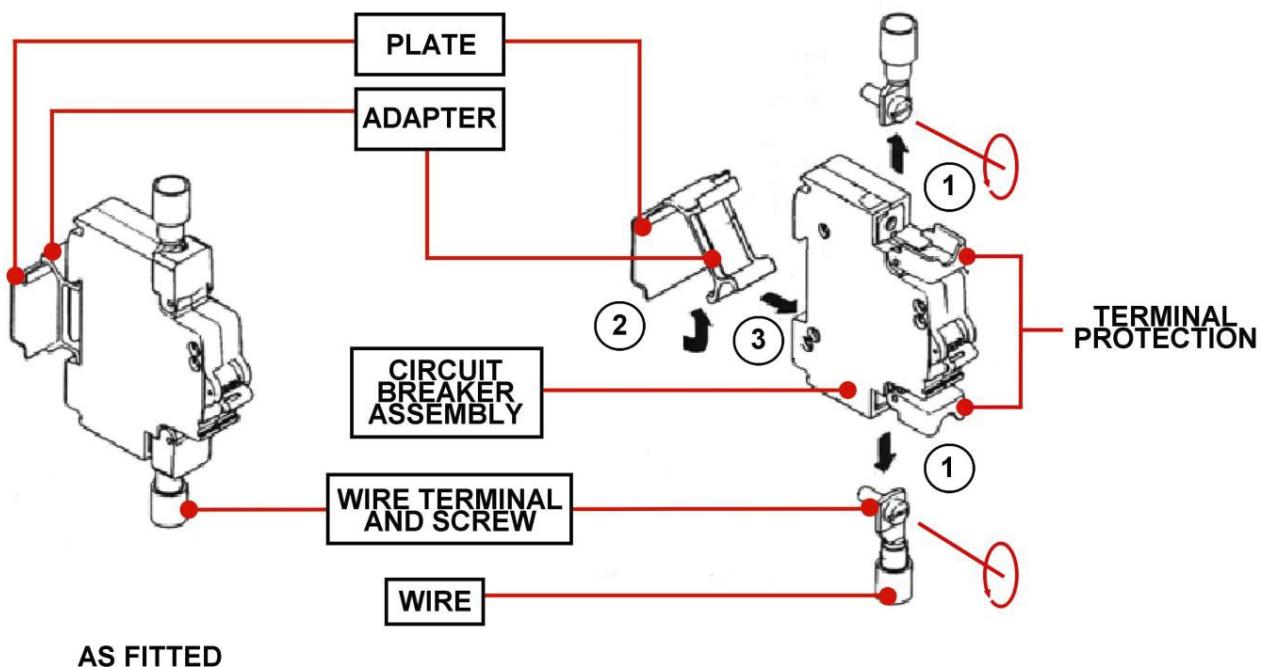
LV LOCKER -TYPICAL CIRCUIT BREAKER REMOVAL
